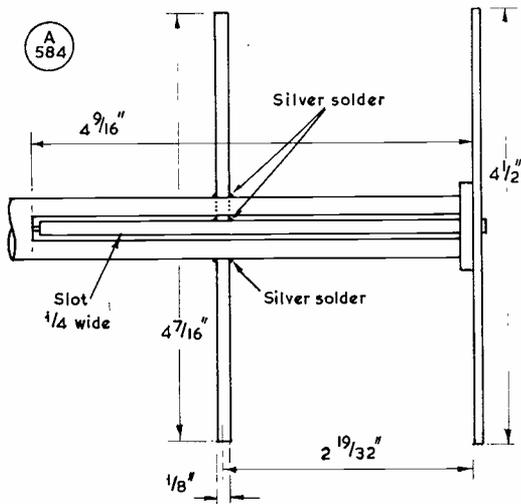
Dimensions and mechanical details for the 23-centimetre dipole and reflector assembly.
